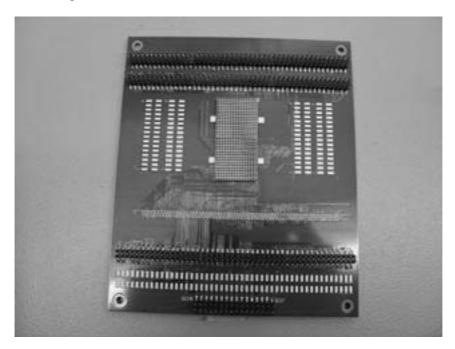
The picture of the test board assembled with two tiled novel detector micro-modules.
